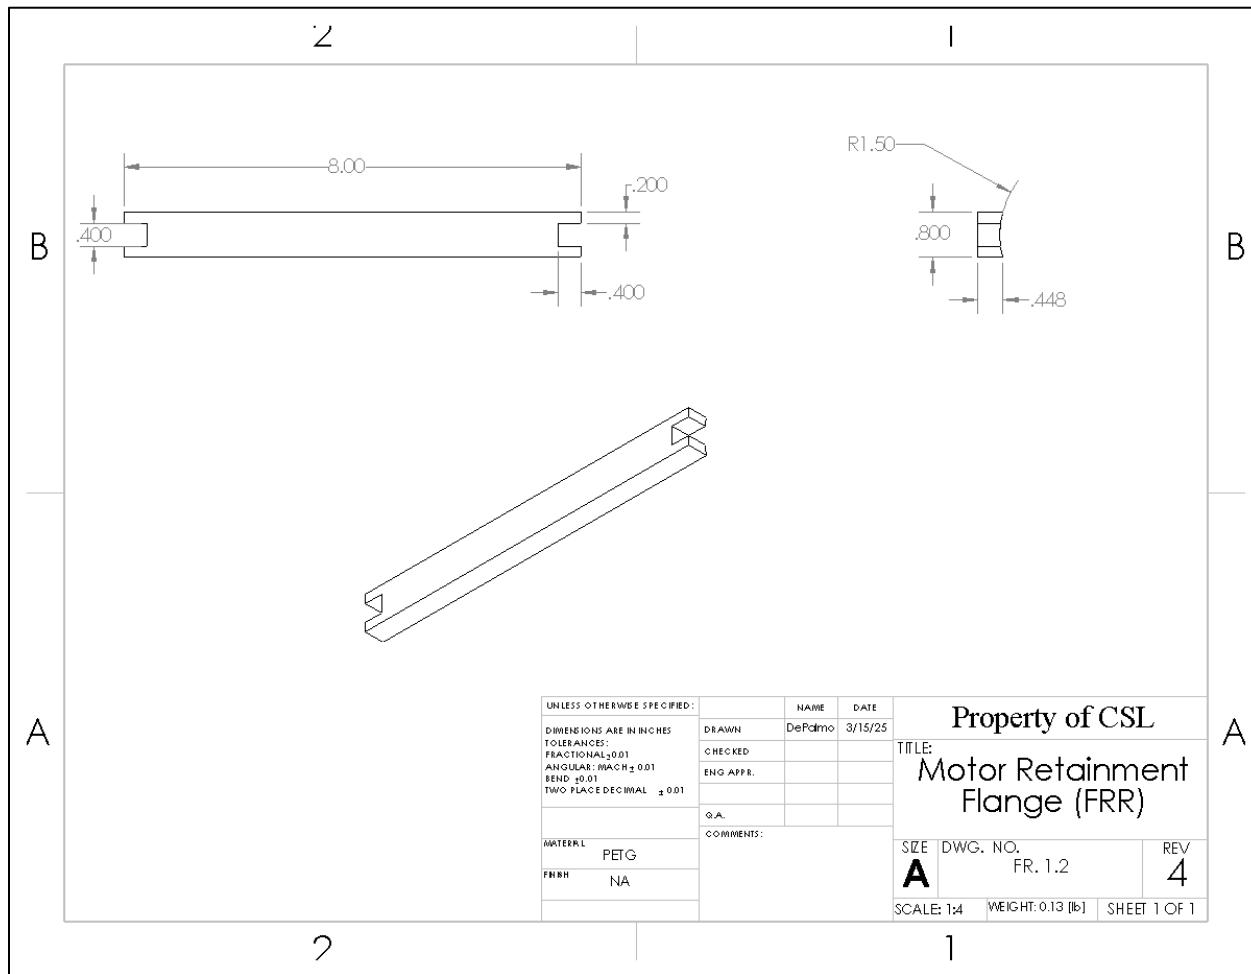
Dimensioned SolidWorks drawing of the motor retention flange.
